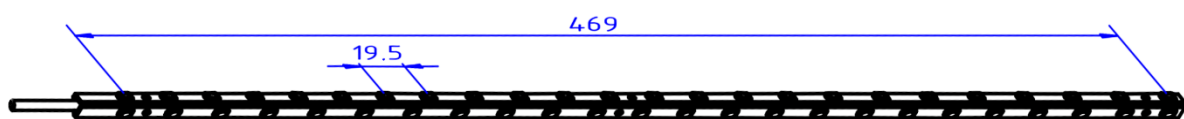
Engineering drawing of one light bar for the cptPBR. Measurements in millimeter.
